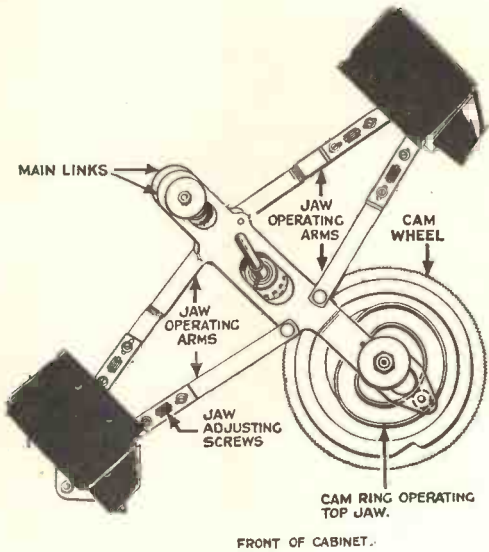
HERE ARE SHOWN DETAILS OF THE JAW OPERATING MECHANISM. The complete mechanism is shown in Fig. 11.
